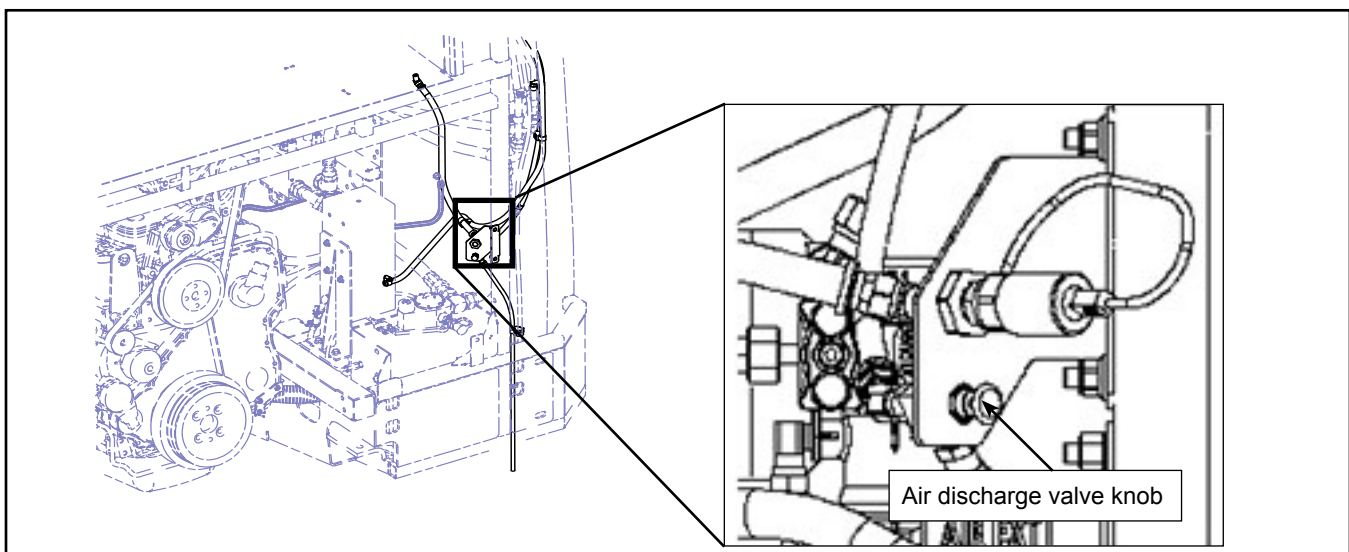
Location of the Air Discharge Valve Knob in the Engine Compartment
